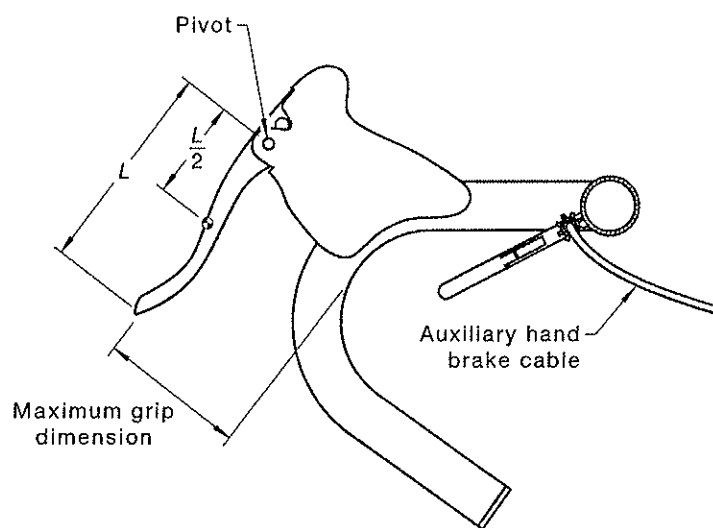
TYPICAL HANDBRAKE LEVER SHOWING GRIP DIMENSION—DROPPED HANDLEBAR
